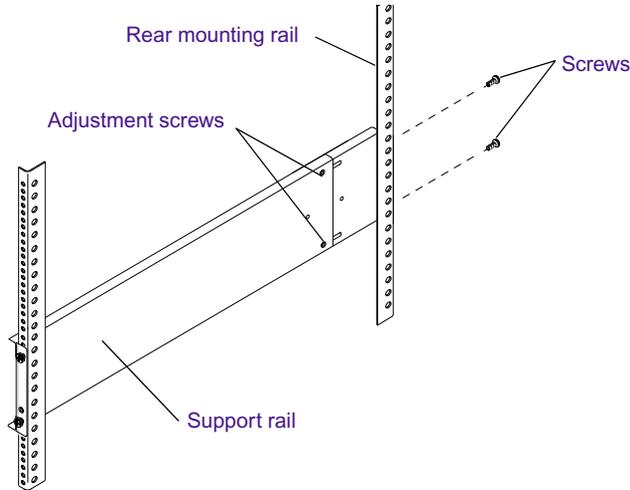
Attaching the MediaDock Ultra320 Rails to the Rack Back Mounting Rails
